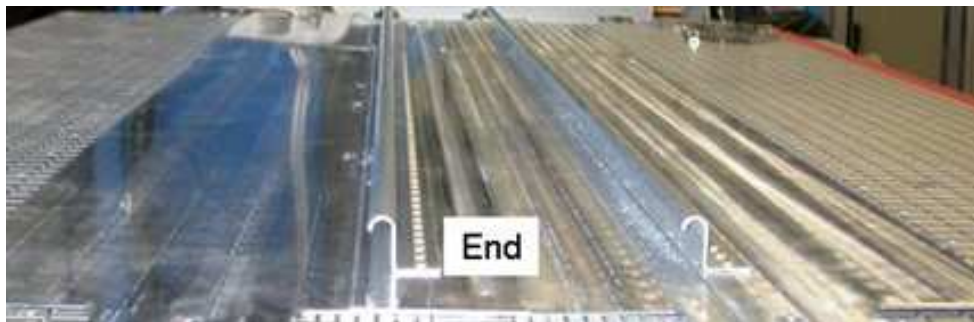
Large friction stir welded sheet with FSW direction.
